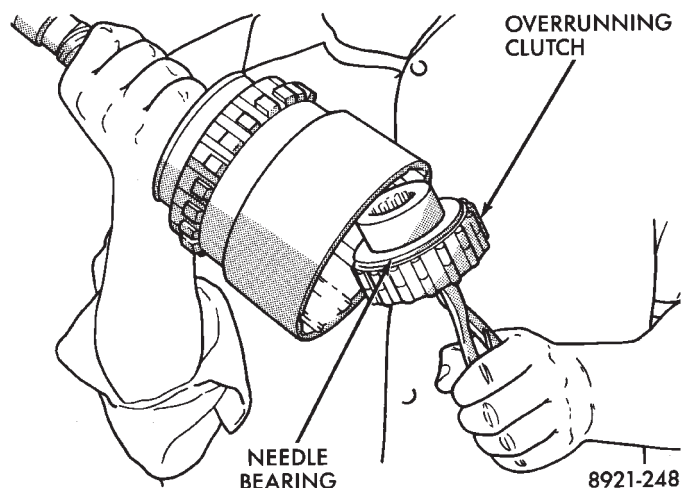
Overrunning Clutch Assembly Removal/Installation
